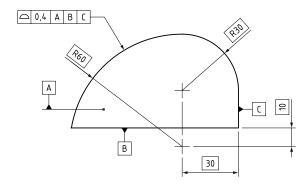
Examples of geometrical tolerancing (Cont.)
